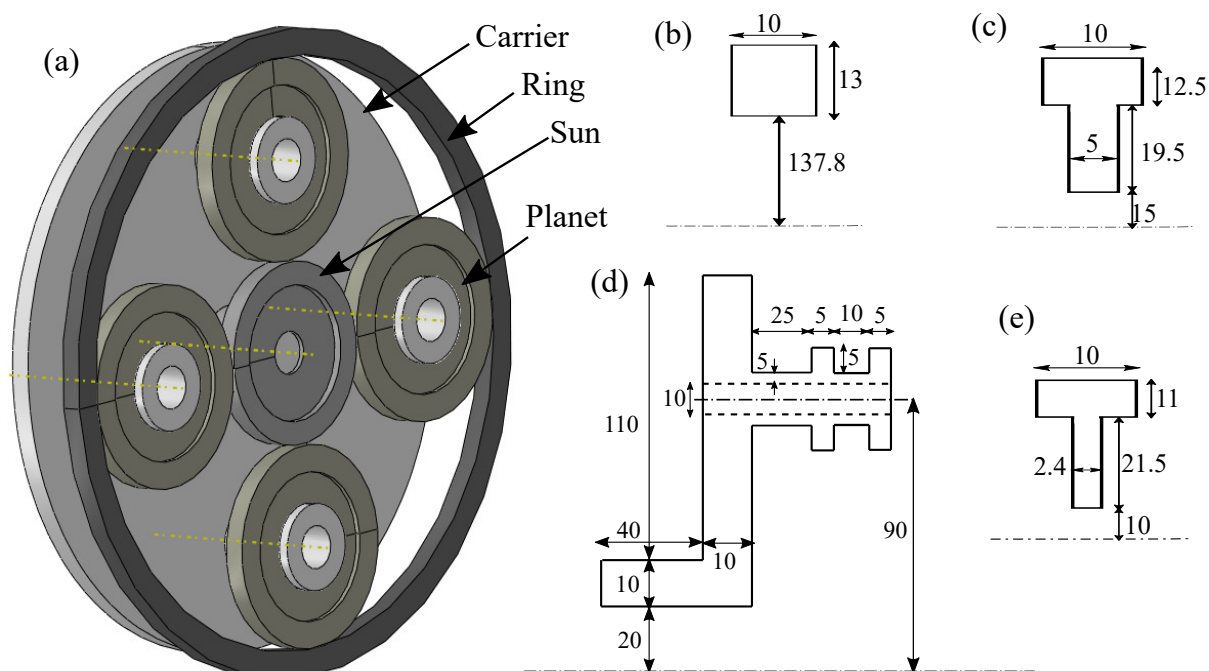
(a) Four-planet planetary gear with dimensions in millimeters for (b) ring gear, (c) planet gear, (d) carrier, and (e) sun gear
